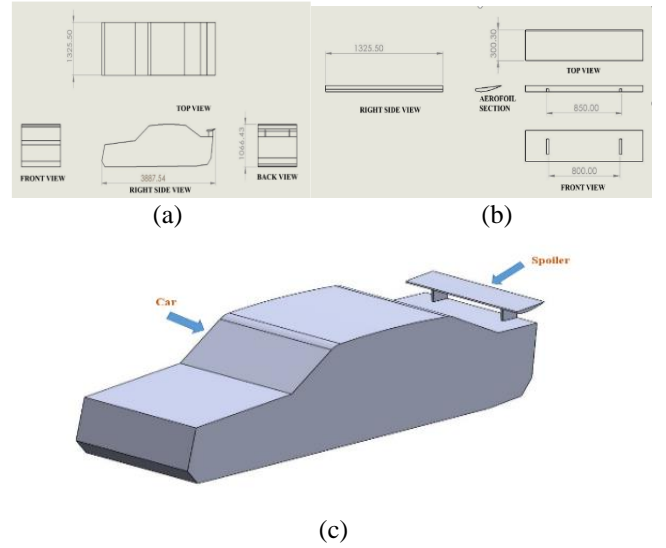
(a) 3D vehicle model with relevant dimensions (meter); (b) Spoiler model with relevant dimensions (meter); (c) CAD MODEL of car with spoiler;
